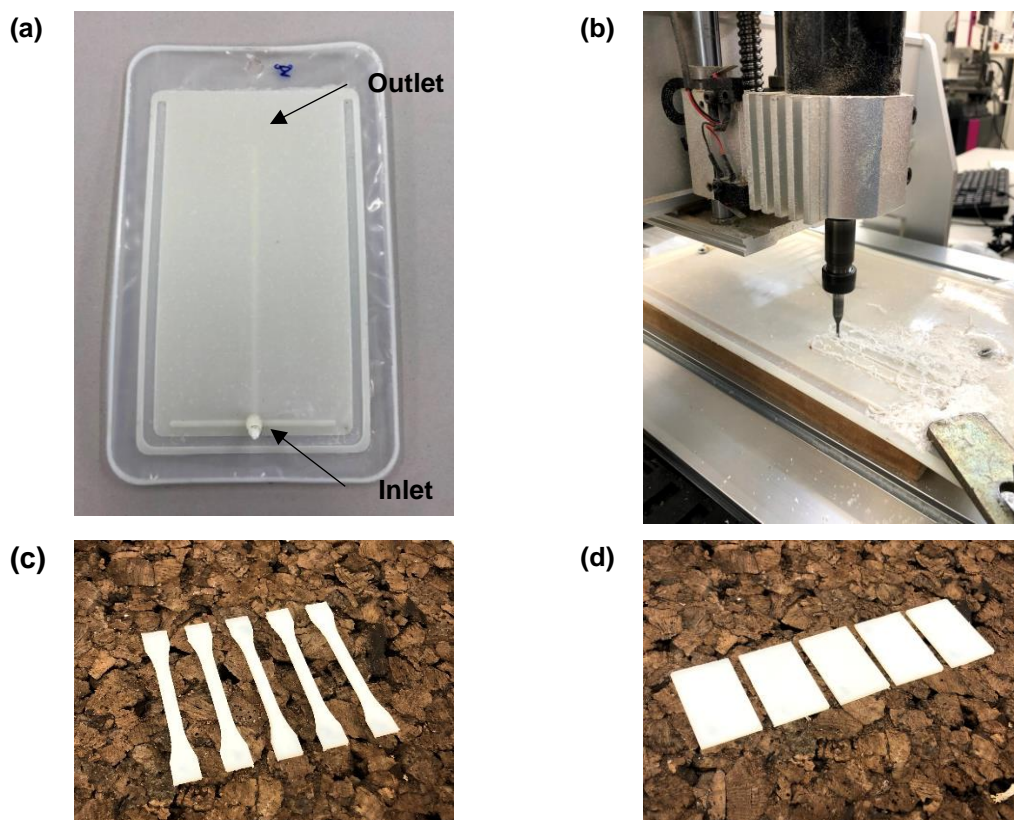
(a) PA6 plate; (b) CNC machining; (c) Tensile and (d) 3-point bending specimens.
